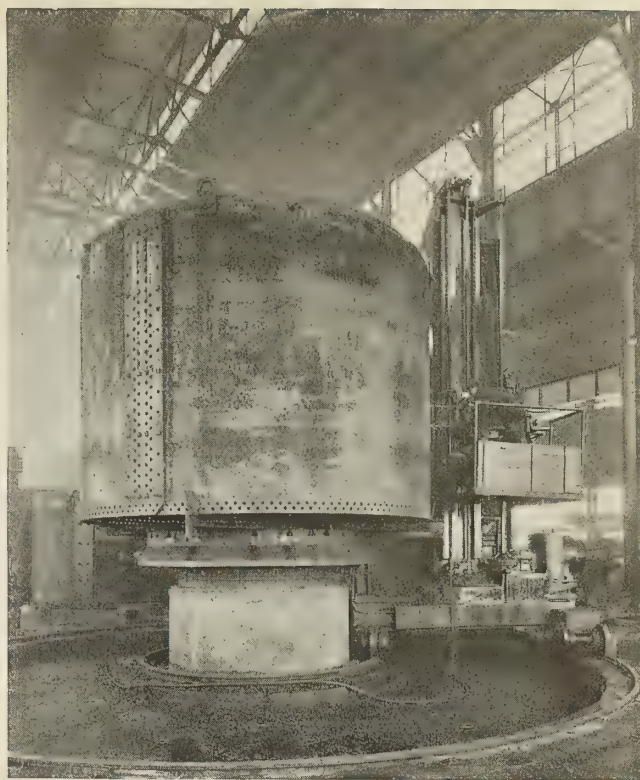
Three-Spindle Detrick & Harvey Boiler Shell Drill
